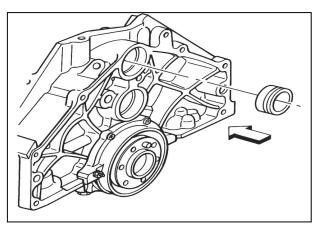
Rear Balance Shaft Sleeve Bearing
